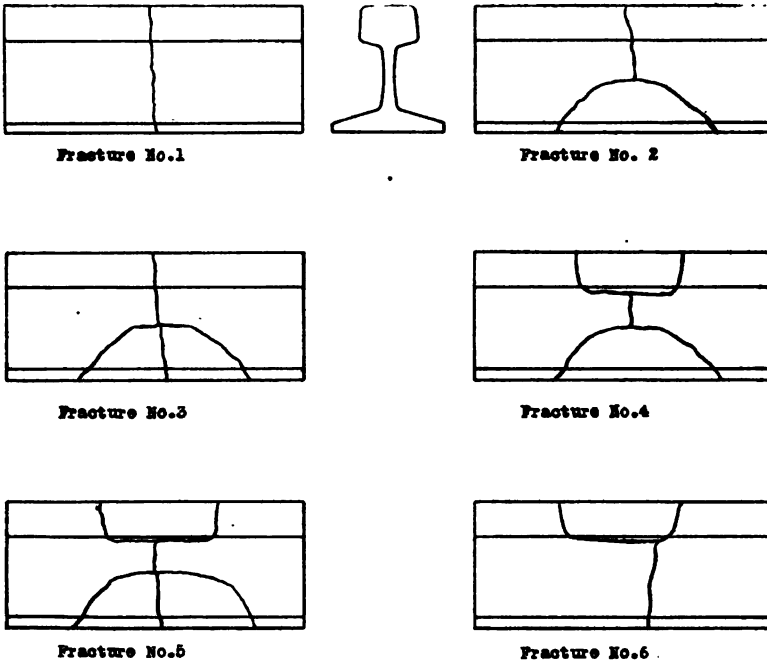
TYPES OF FRACTURES IN QUICK BEND TEST.
